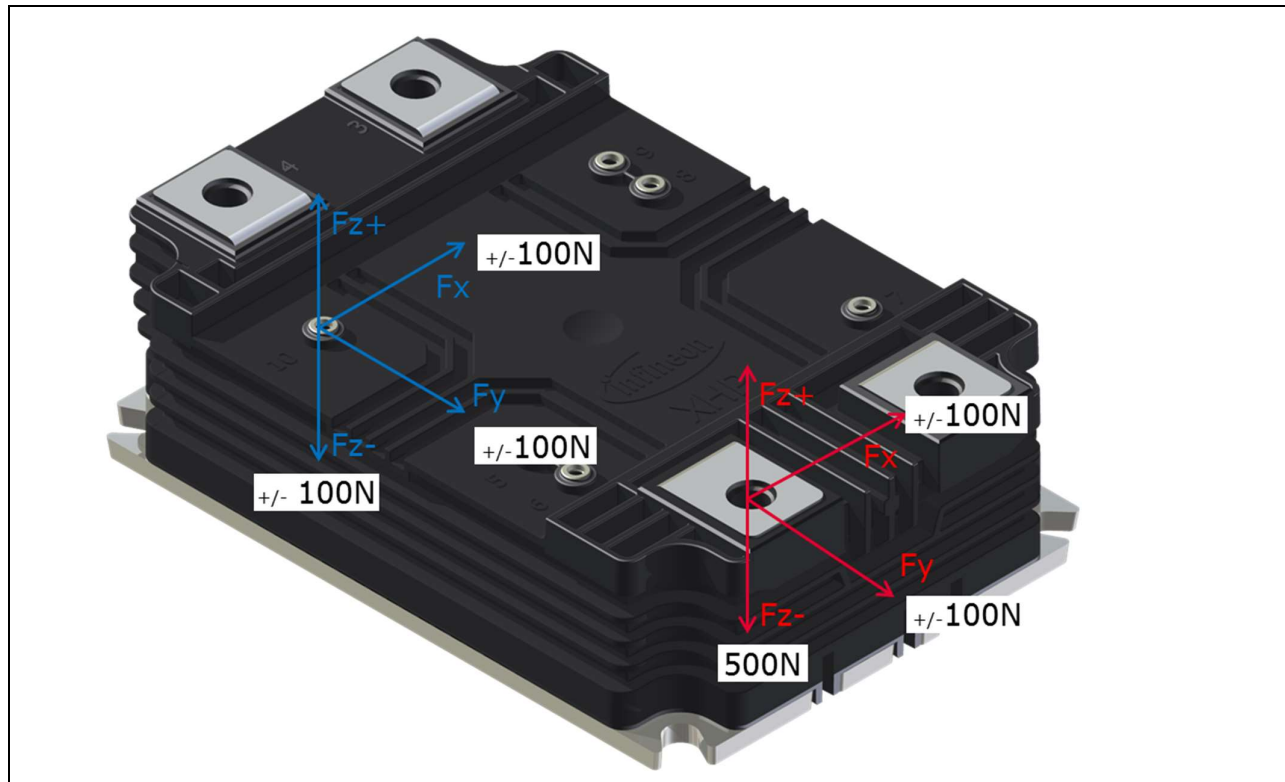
Maximum permissible forces during the assembly process at the terminals of a XHP™ 3 module
